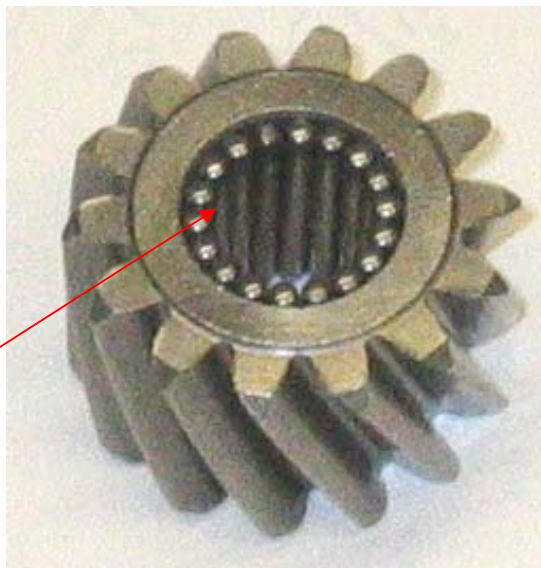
Picture of pinion gear and the needle bearing which carries the radial load between it and the shaft.
